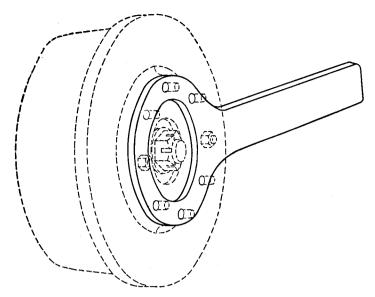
55186 SAFETY CLUTCH HOLDING WRENCH
